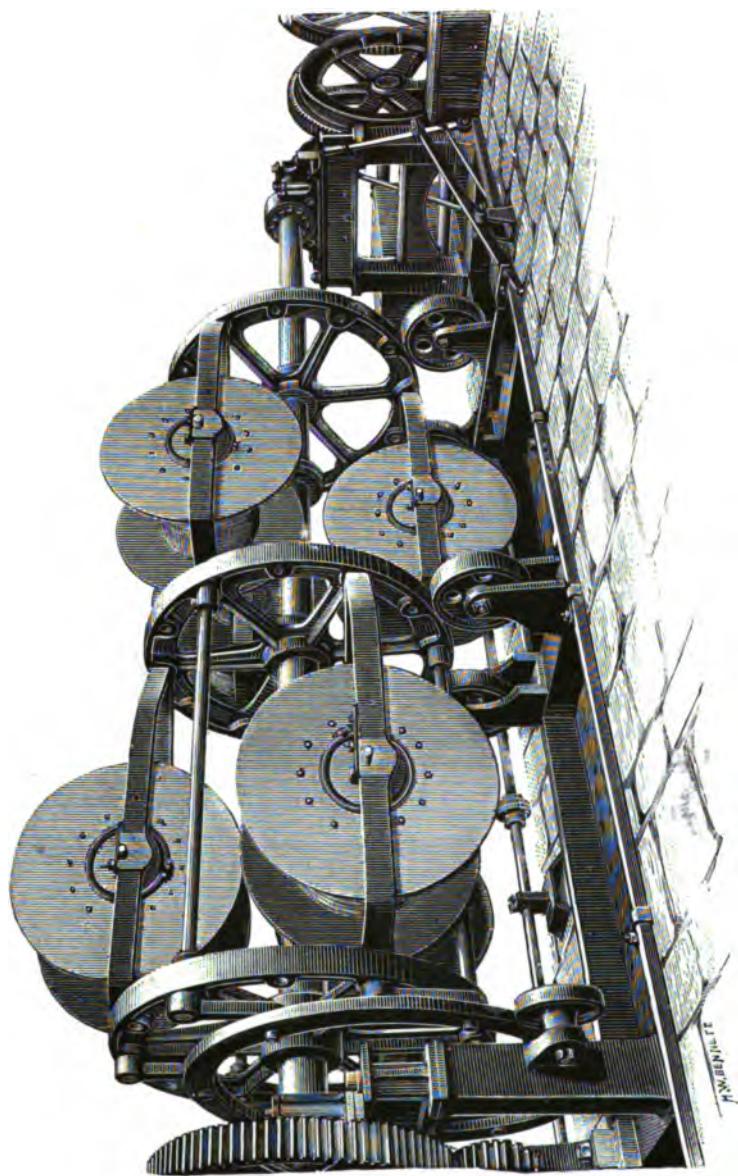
LARGE ROPE-CLOSING MACHINE.
